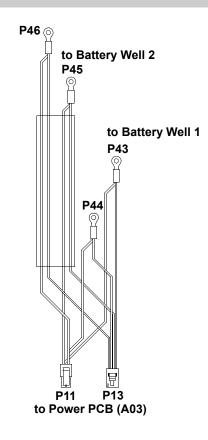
(V1) Power PCB cable connections. V2 cable, only P11 is used.
